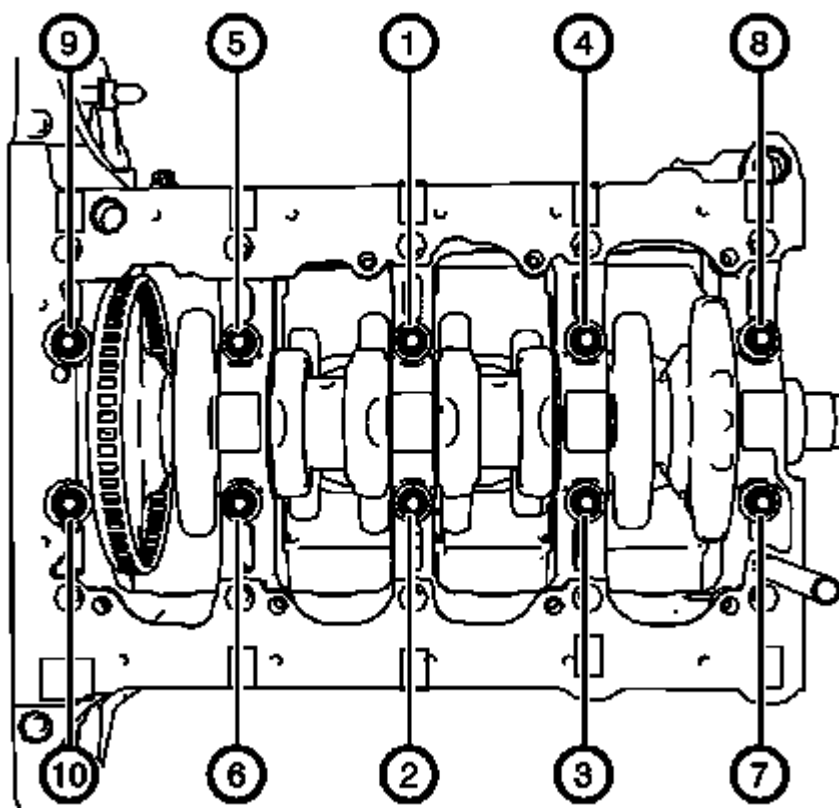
Inner Crankshaft Bearing Cap Tie Plate Bolts Tightening Sequence
